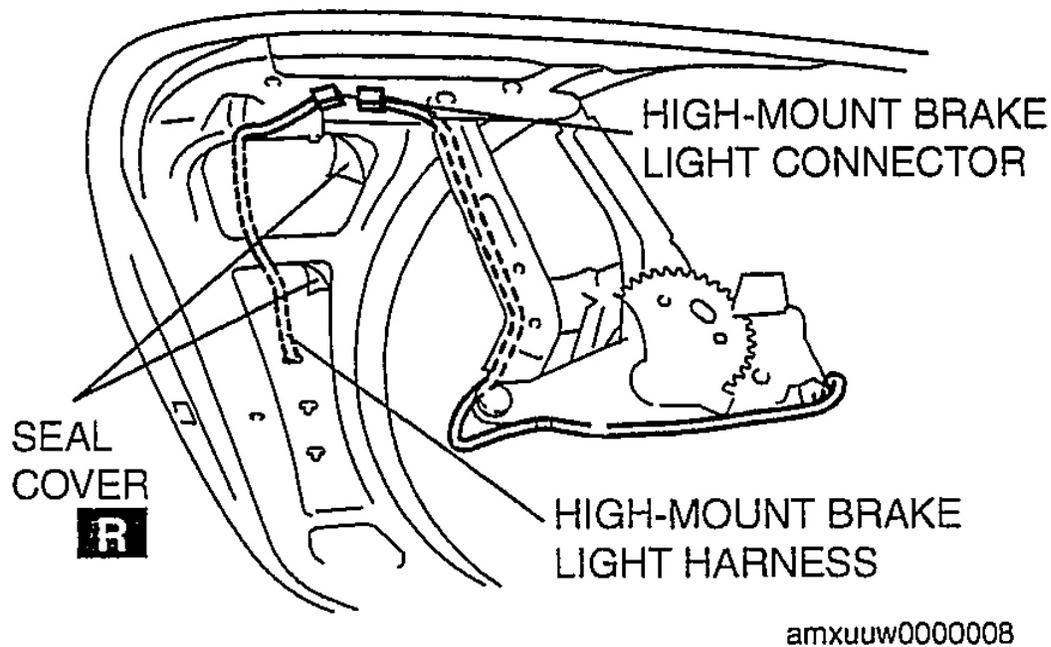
Identifying High Mount Brake Light Connector And Harness
